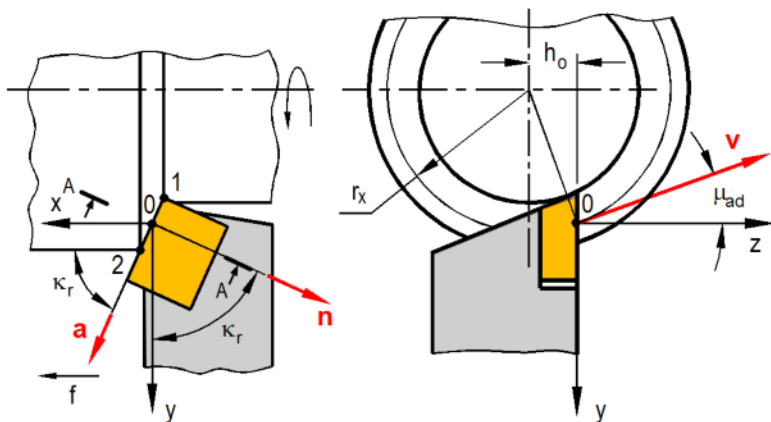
Geometrical model of a single-point cutting tool having  $0 < \kappa_r < \pi/2$
